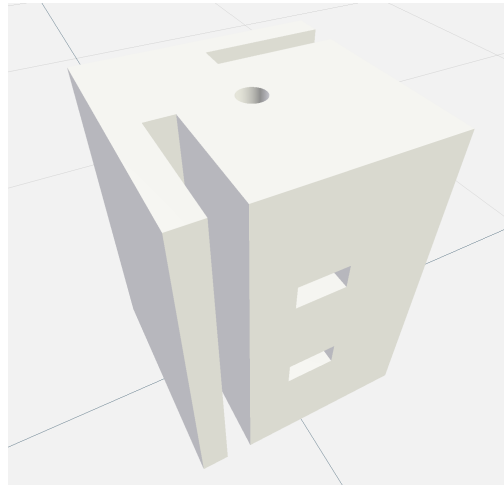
Corner column equipped with a side slot, intended for the attachment of a side facade, and it is constructed using 3D printing technology with PLA material.
